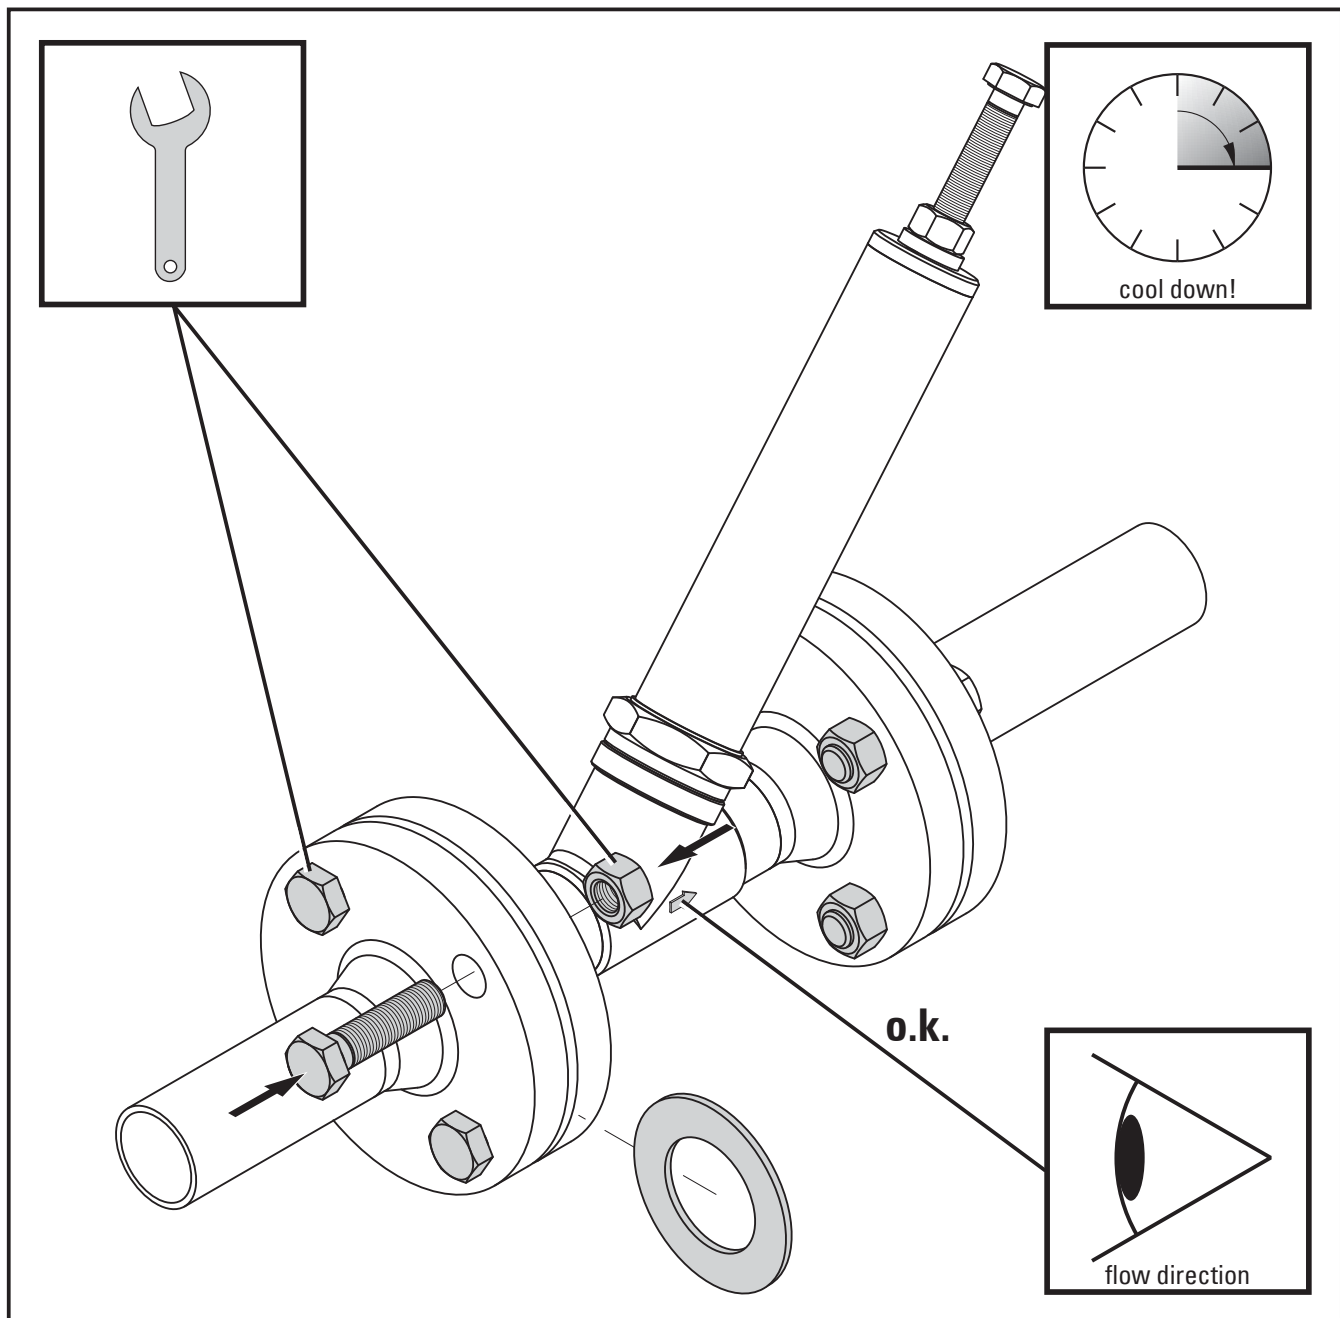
spill valve, mounting with flanged connection (Fig.: Art. UV330104)
